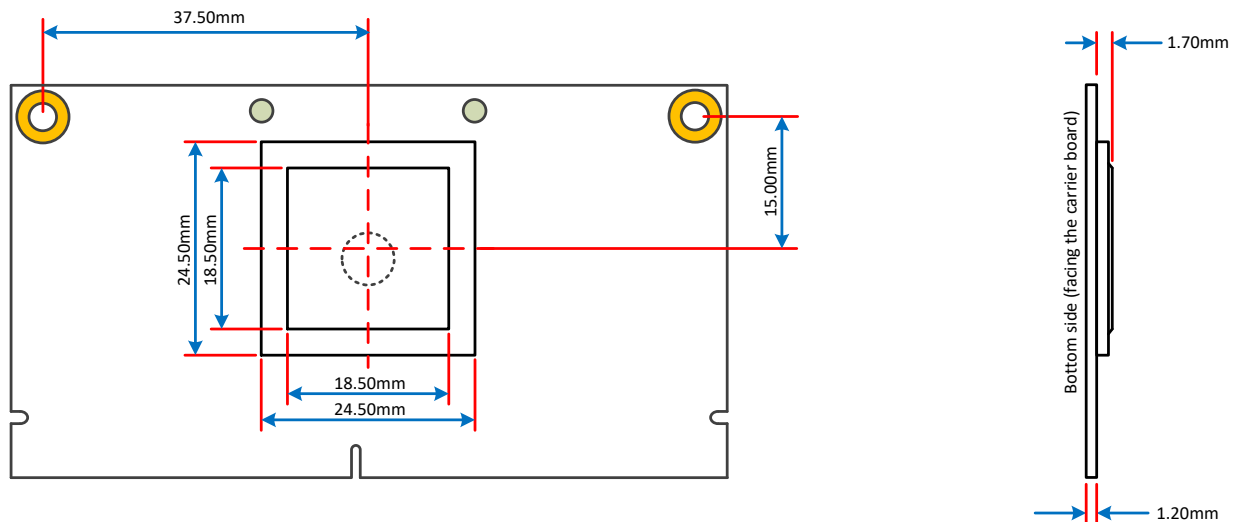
Mechanical position of Tegra T30 SoC (top view)
